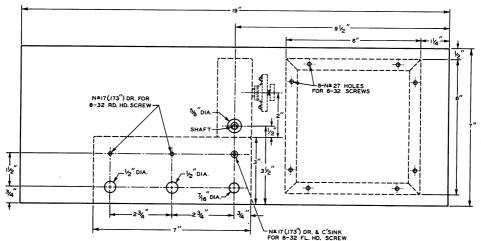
Panel-layout drawing showing the location of the power-supply chassis, VFO box, and the dial gear box.
